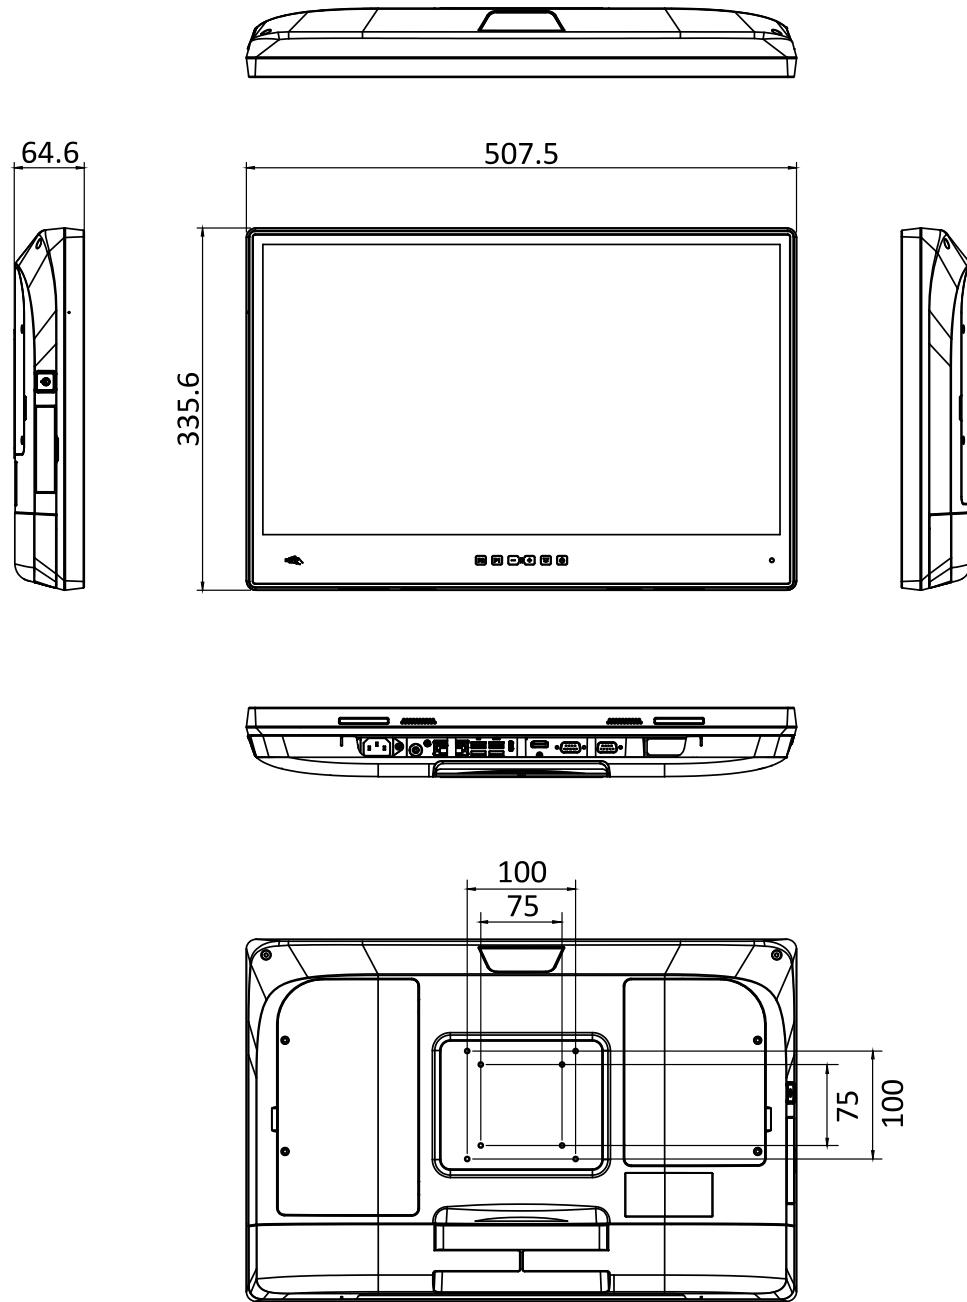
POCi-W22-RPL Dimensions (mm)
